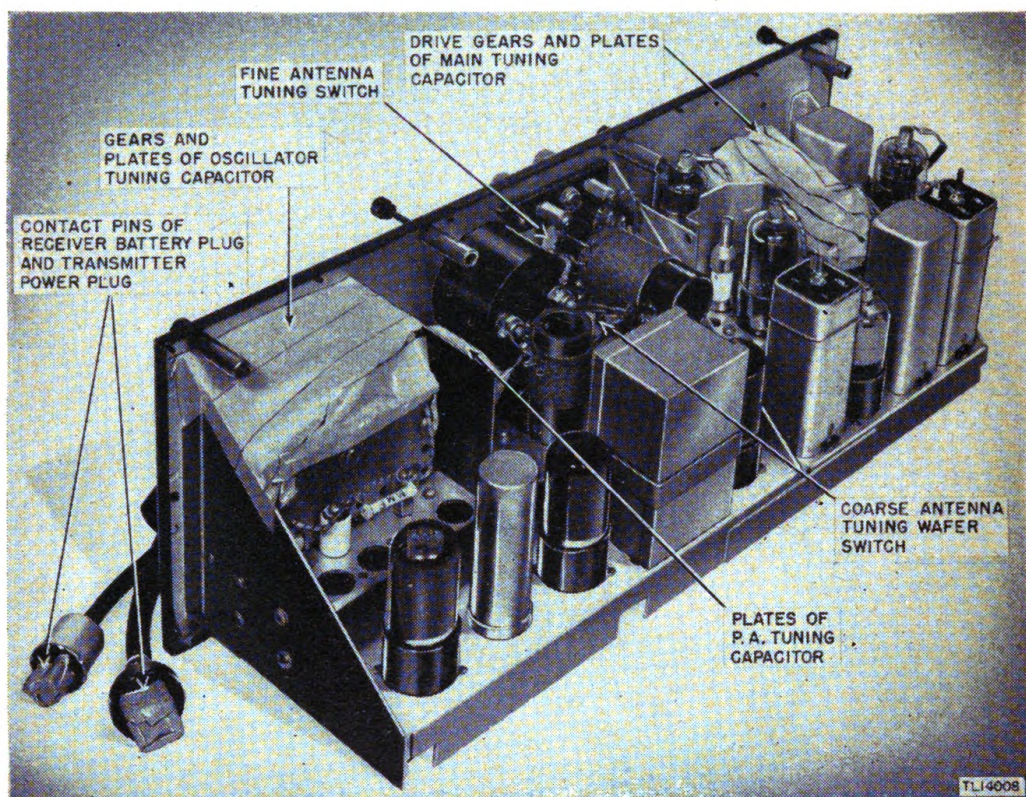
Radio receiver and transmitter BC-474-()—top view of chassis showing method of masking parts.
